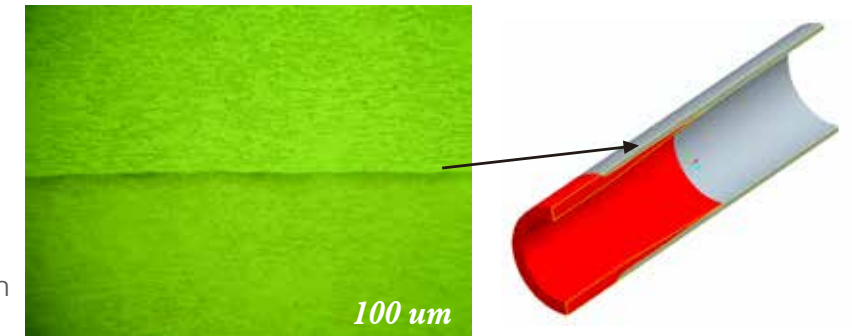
AMSpec's patented technique in 7x50/DB(Diffusion Bonding) tube.
